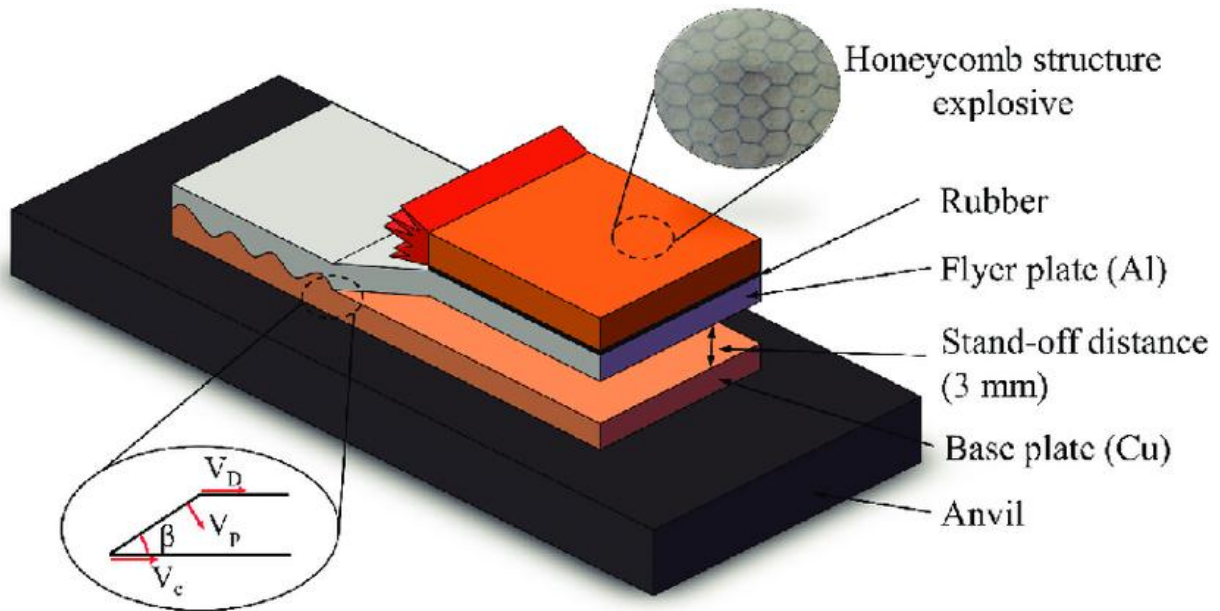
Explosion Welding and Solid-State Techniques
